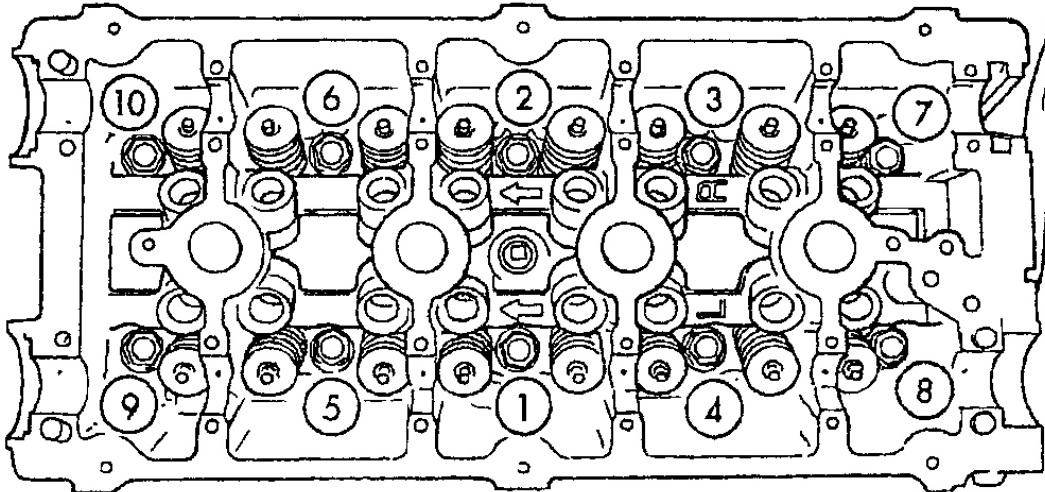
Tightening Sequence Of Camshaft Bearing Cap Bolts
